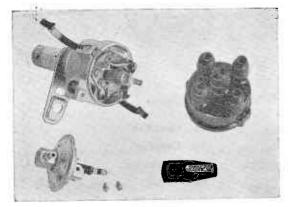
Removing Cap, Rotor and Vacuum Controller
